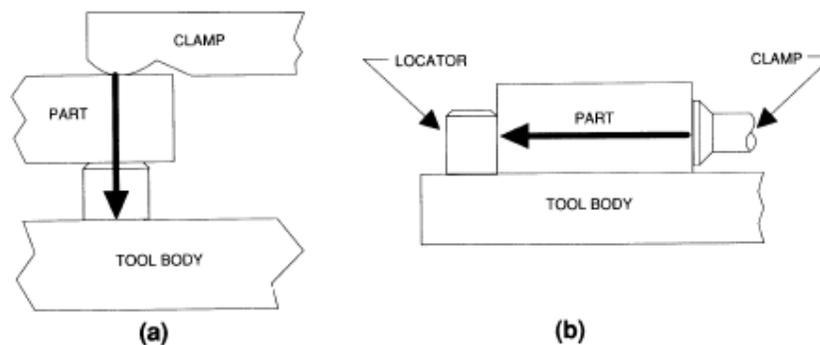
Clamps should always be positioned so the clamping force is directed into the supports or locators.
